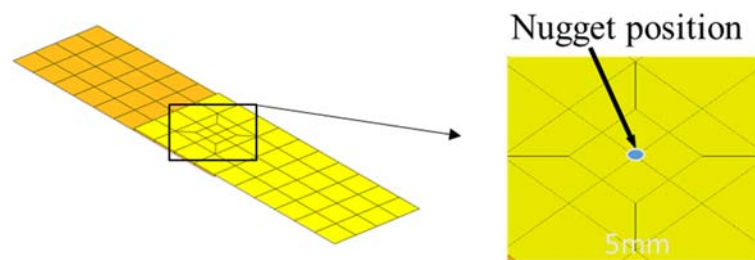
Finite element model of spot welded tensile shear specimen.
